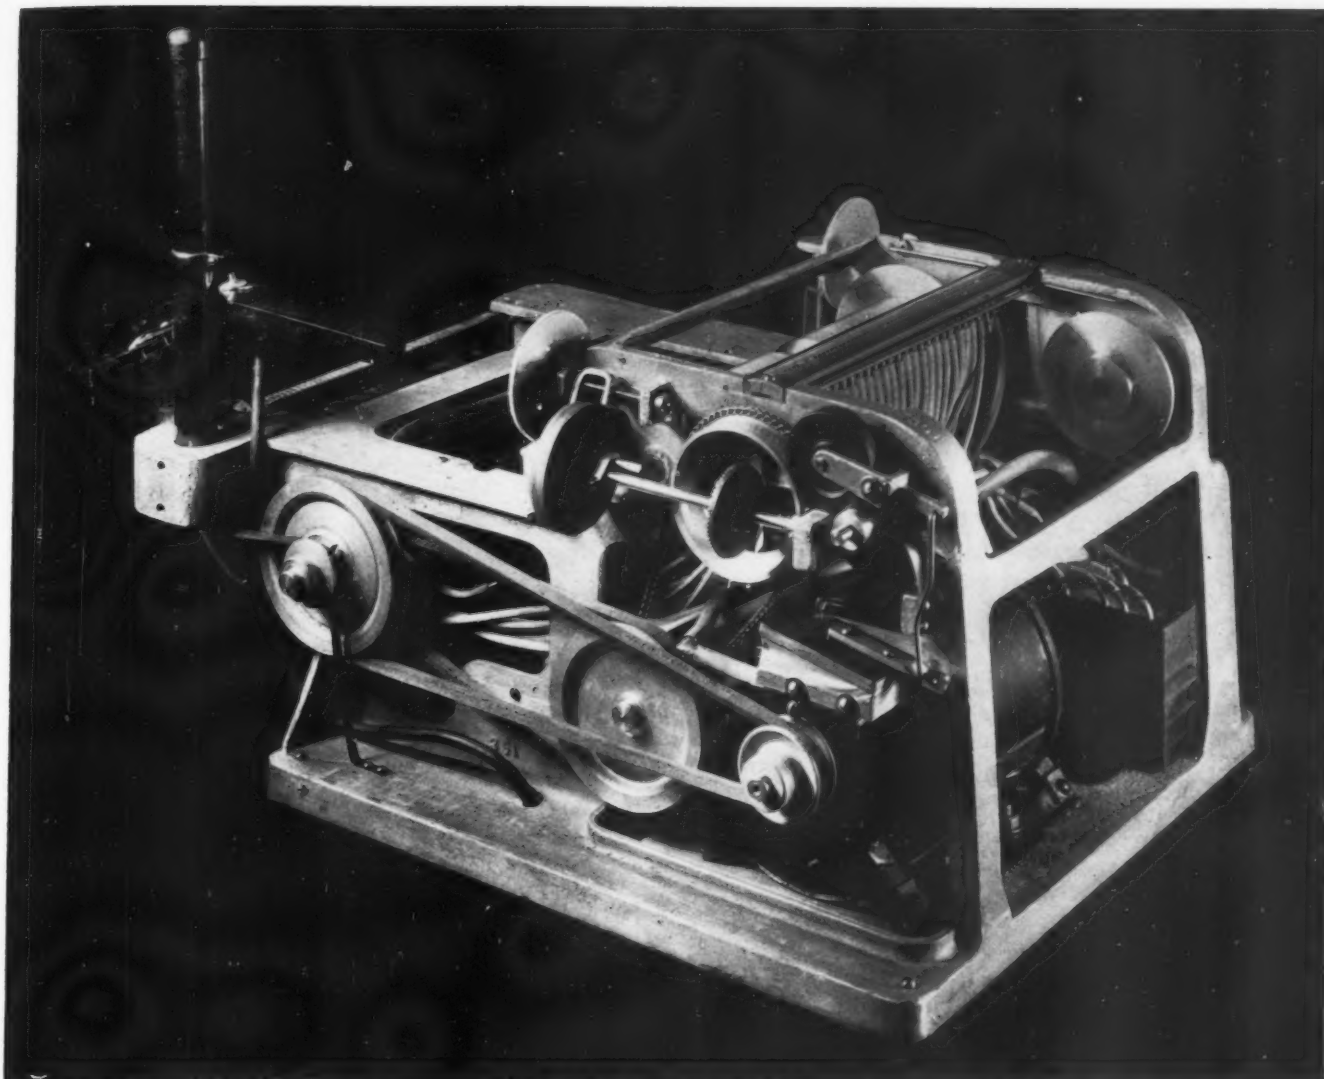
One-piece aluminum frame gives lightness to the machine. V-belt drive from slow speed motor is quiet and affords further speed reduction. Belt sheaves and other small parts are aluminum
